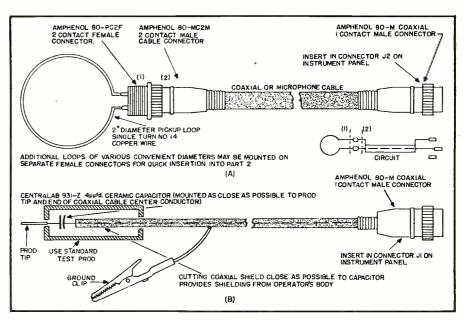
(A) Pickup loop assembly. (B) Probe assembly.
